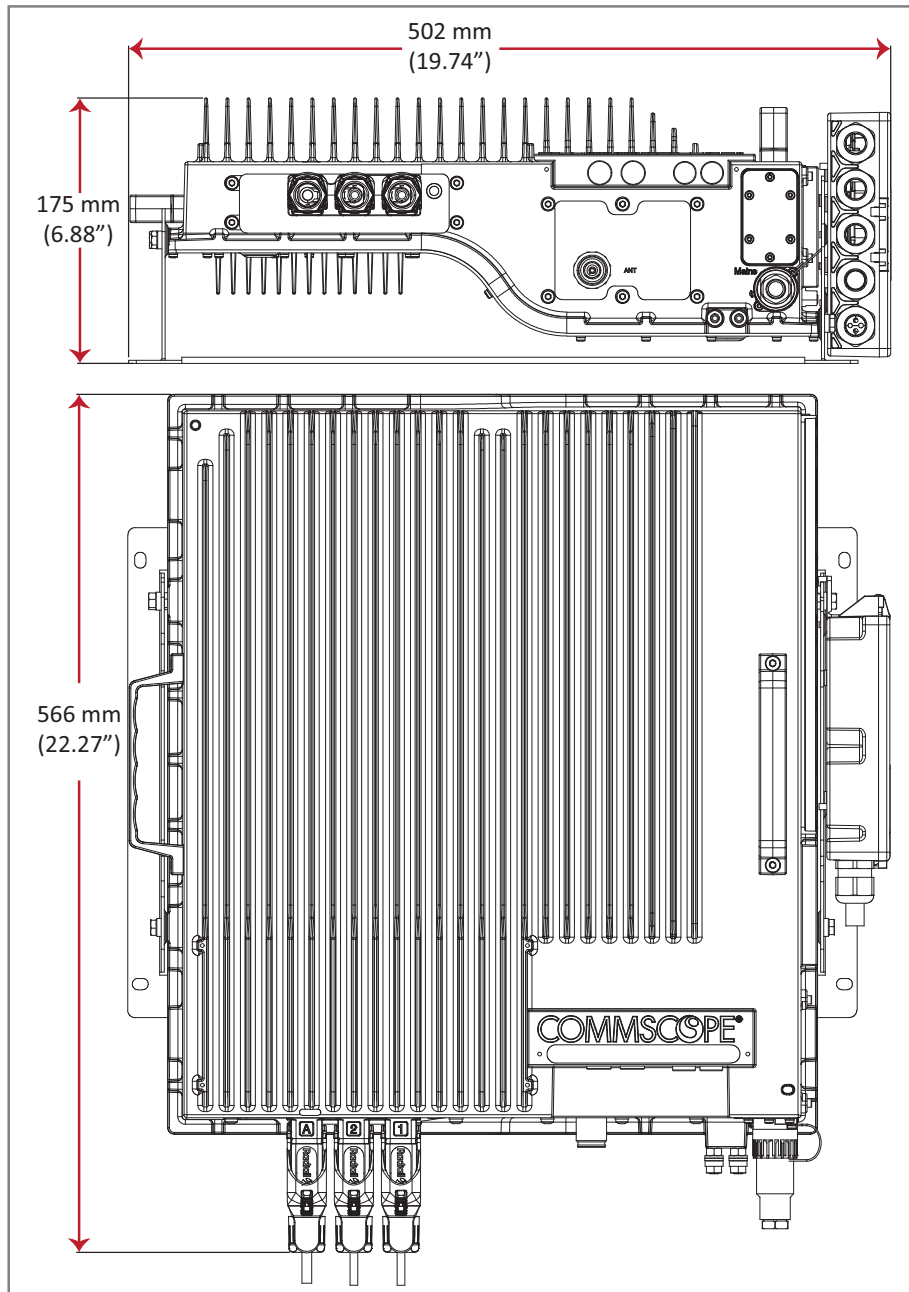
Mounting Dimensions for Single Mounting Bracket with Splice Box
